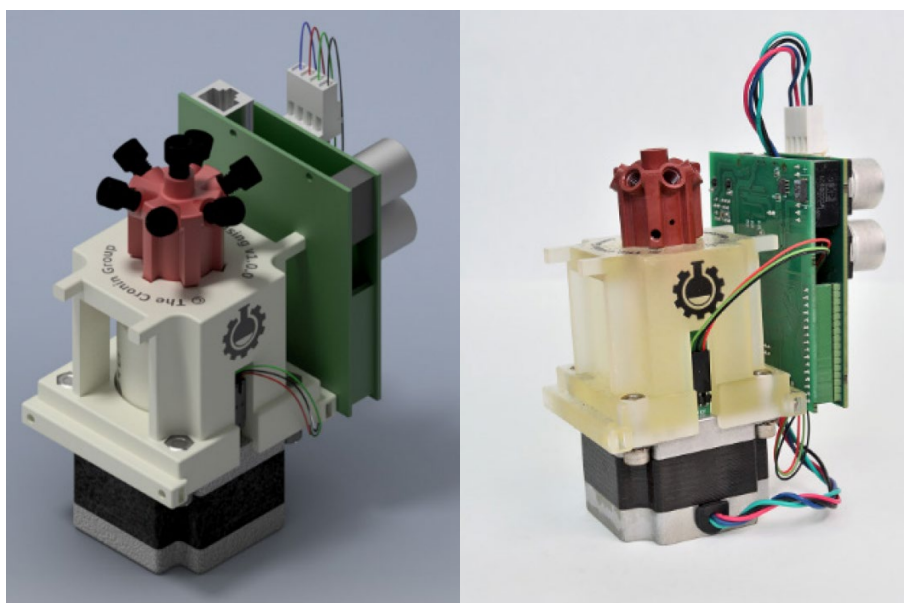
(Left) Autodesk Inventor rendering of the 6-way pump assembly. (Right) Photograph of the valve assembly. Reproduced from Steiner et al.²
